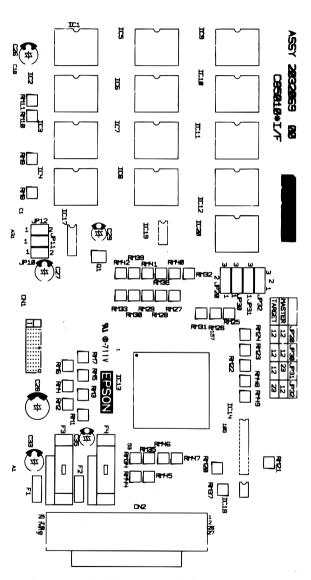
C85010 I/F (ISA Board) Component Layout (1)
